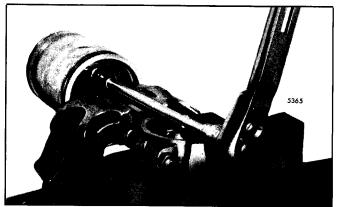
Tightening Connecting Rod to Piston Pin Bolts
